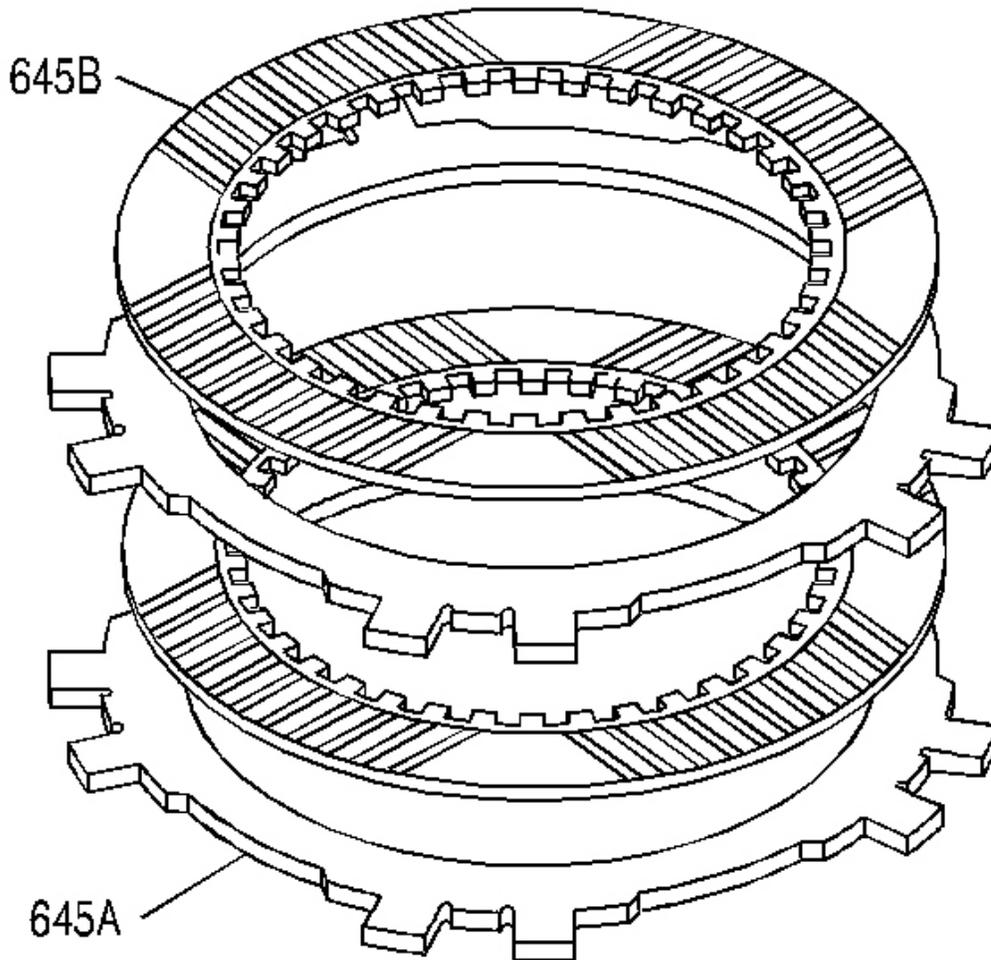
Inspecting Fiber Plate Assemblies & Steel Plates
